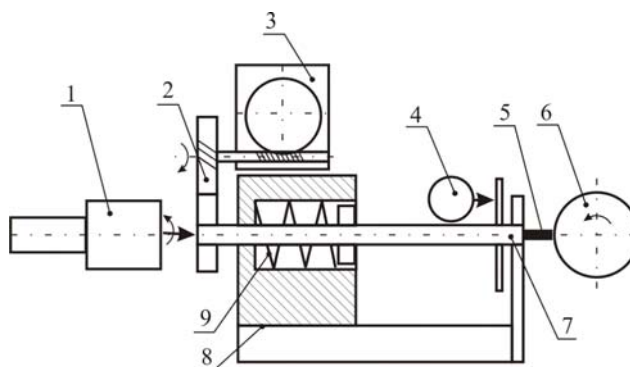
Schematic diagram of the device: 1 – vibrator, 2 – drive of rubbing-in rod, 3 – motor of rubbing-in rod drive, 4 – indicator, 5 – rubbing-in rod, 6 – treated component, 7 – core, 8 – frame, 9 – short element
